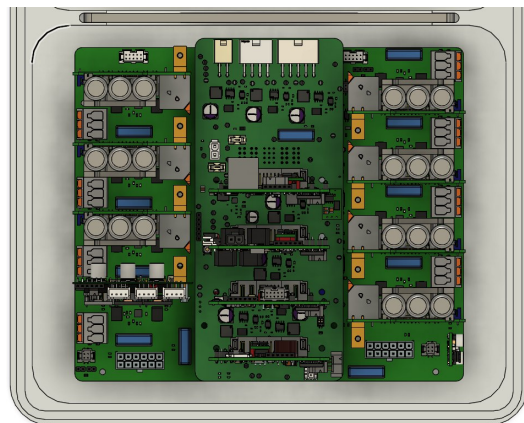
3D view of BBAUV 4.5 Electrical Stack (top view).
